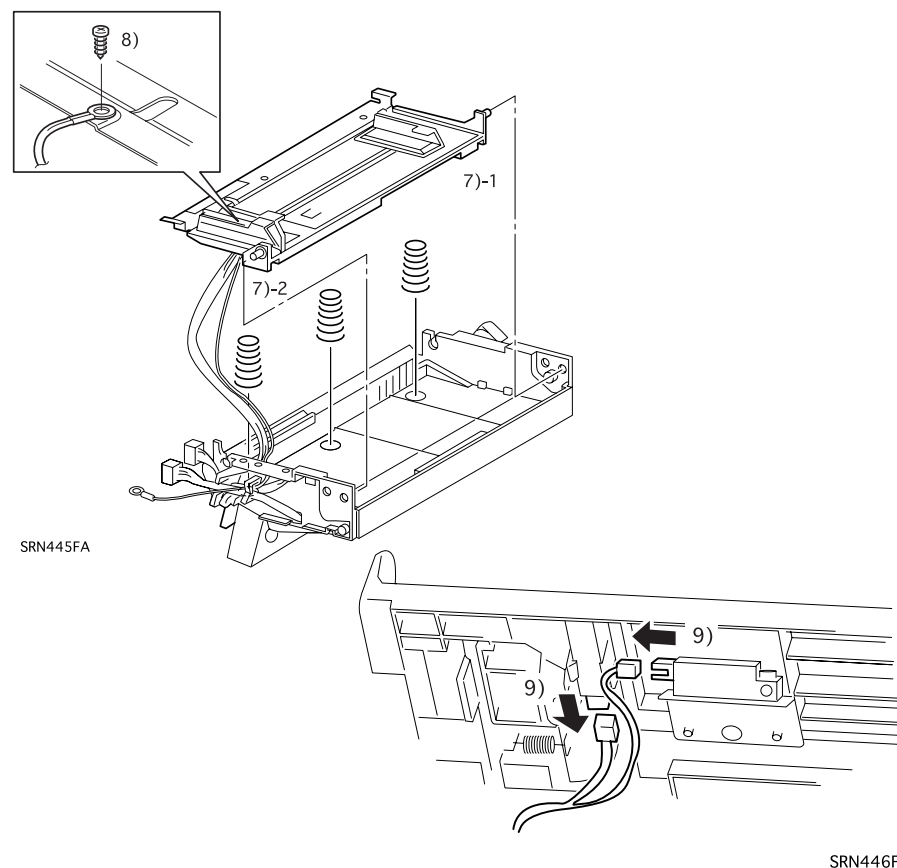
MSI BOTTOM ASSEMBLY Removal
